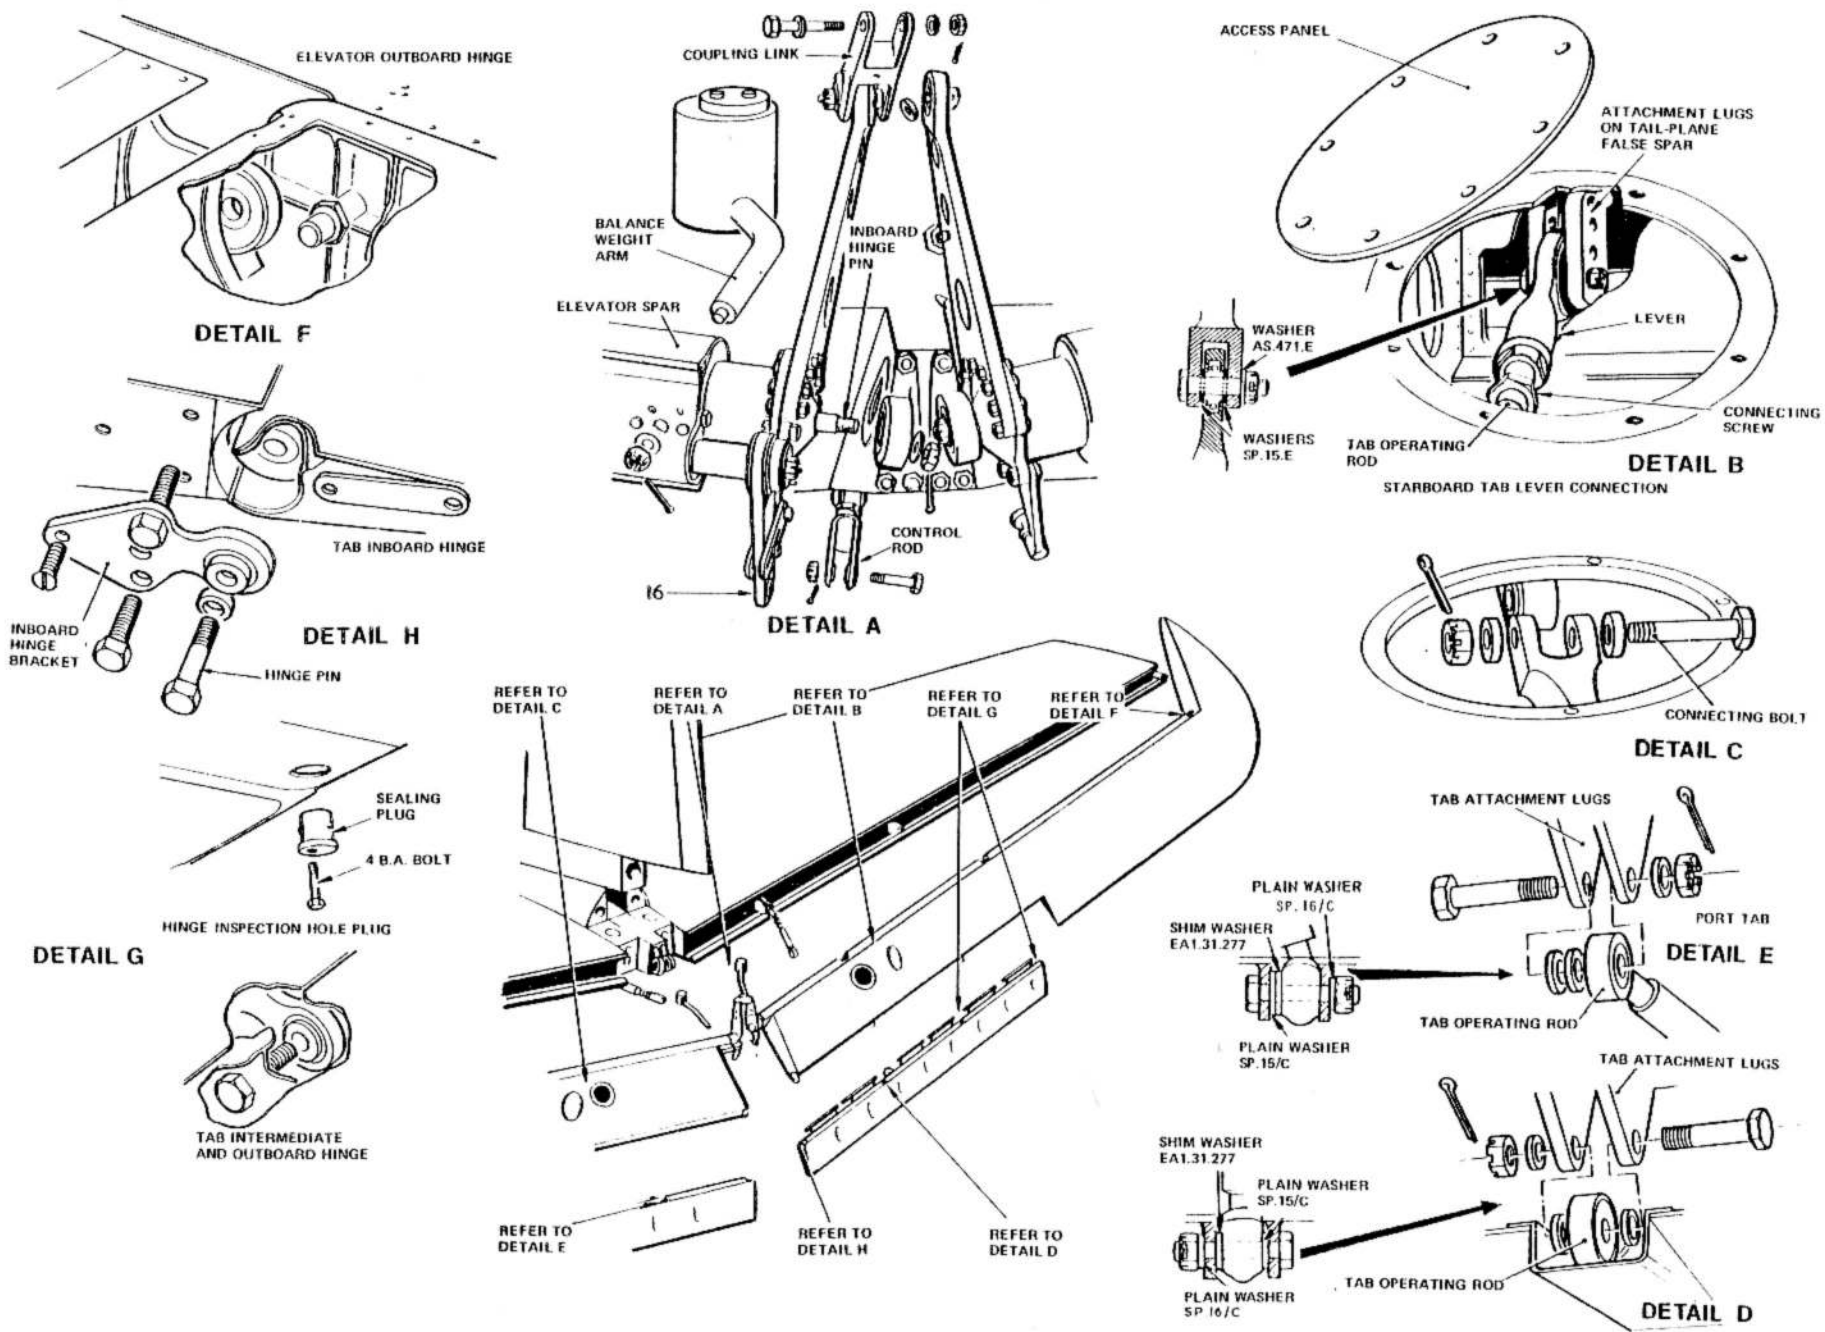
ELEVATOR AND ELEVATOR TAB REMOVAL
